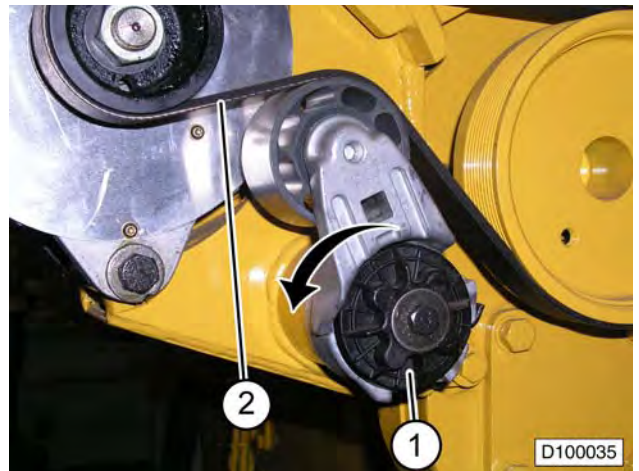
AUTOMATIC BELT TENSIONER ASSEMBLY
